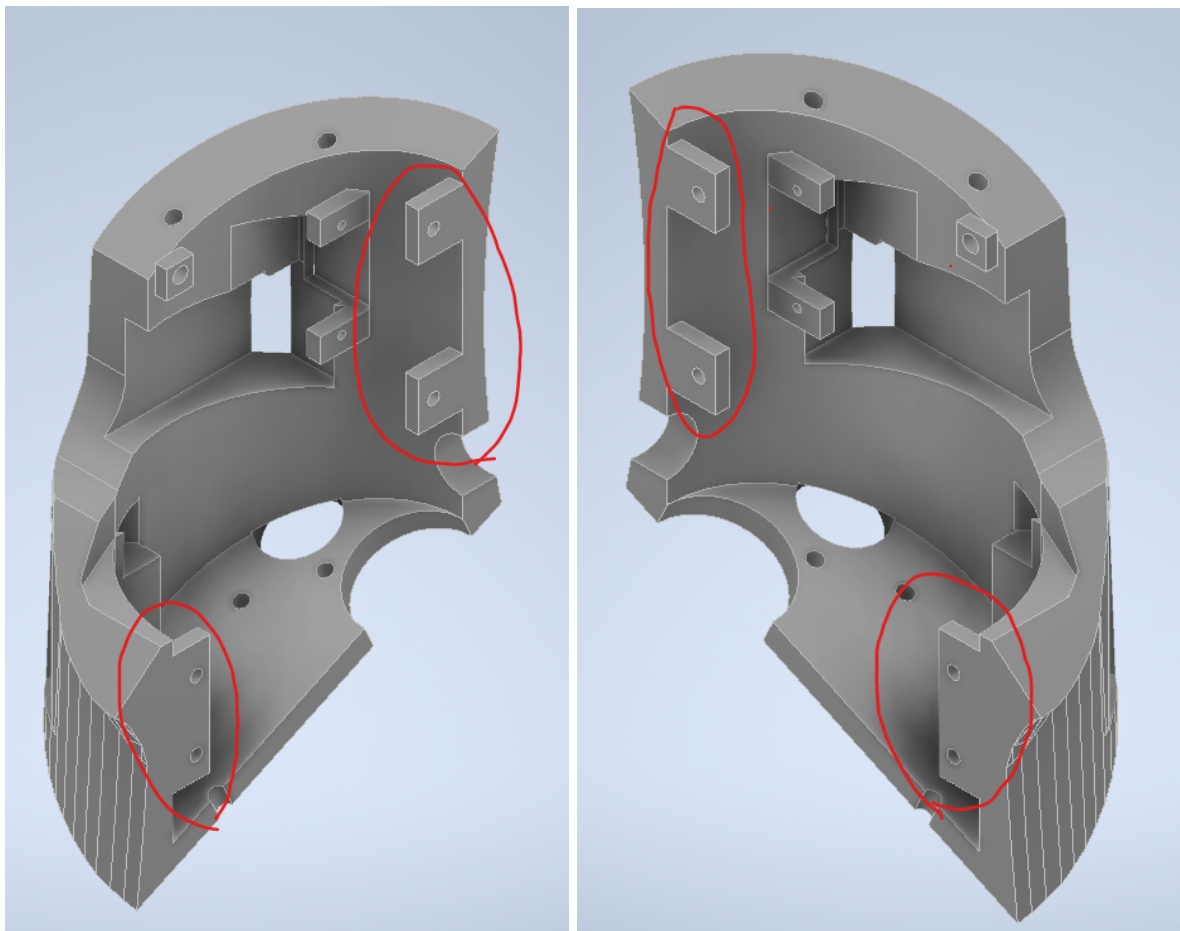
Two halves to the neck lattice showcasing the removed connectors circled in red
